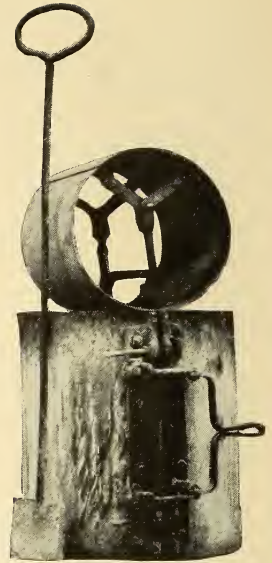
Mold for 8-inch hand-made cement tile. Sheet-metal mold consisting of outer jacket and collapsible inner core. Tamping iron used in molding tile is also shown
